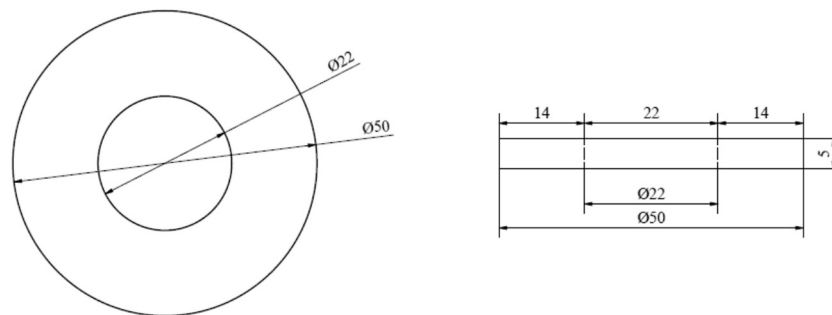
Layout of the washers used to sandwich donut load cell (dimensions in mm).
